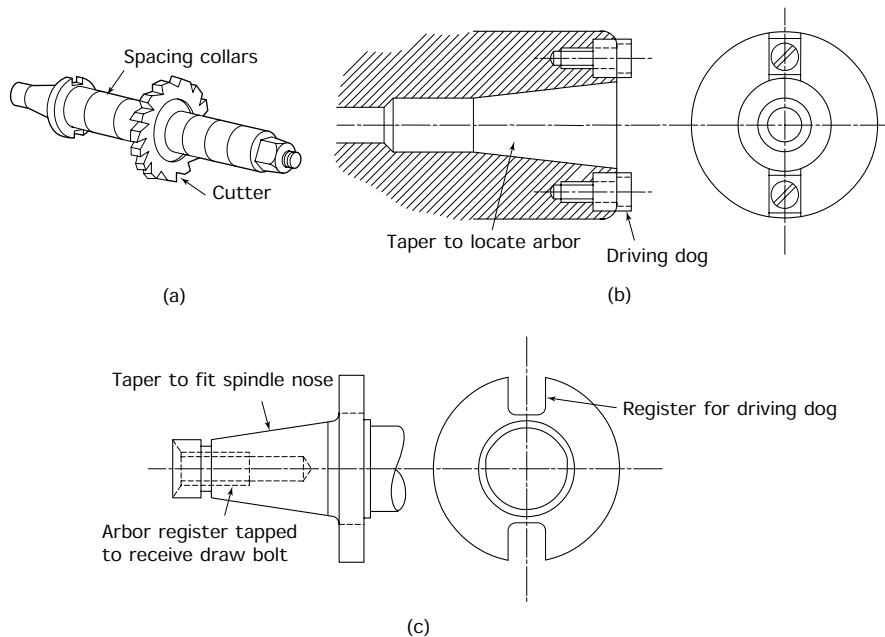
Horizontal milling machine arbor: (a) long arbor for horizontal milling machine; (b) milling machine spindle nose; (c) taper register of arbor to fit spindle nose
